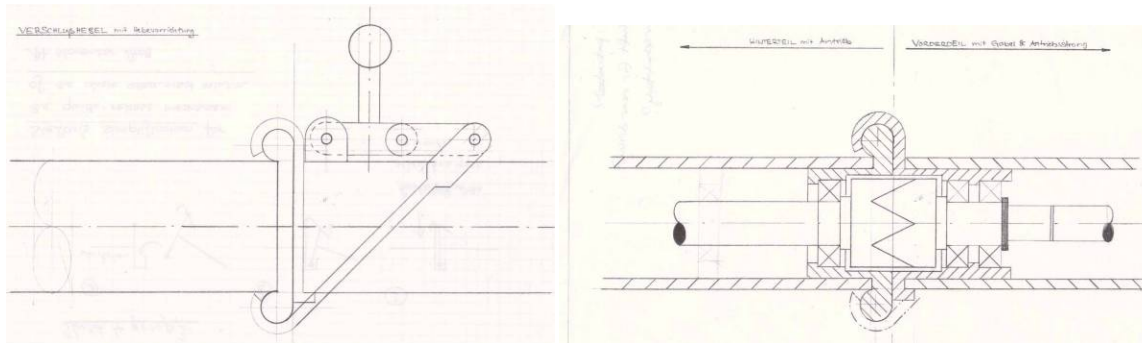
Front View (Left) and Section View (Right) of Lever Attachment Design. Sketches by Stefan Fischer.
